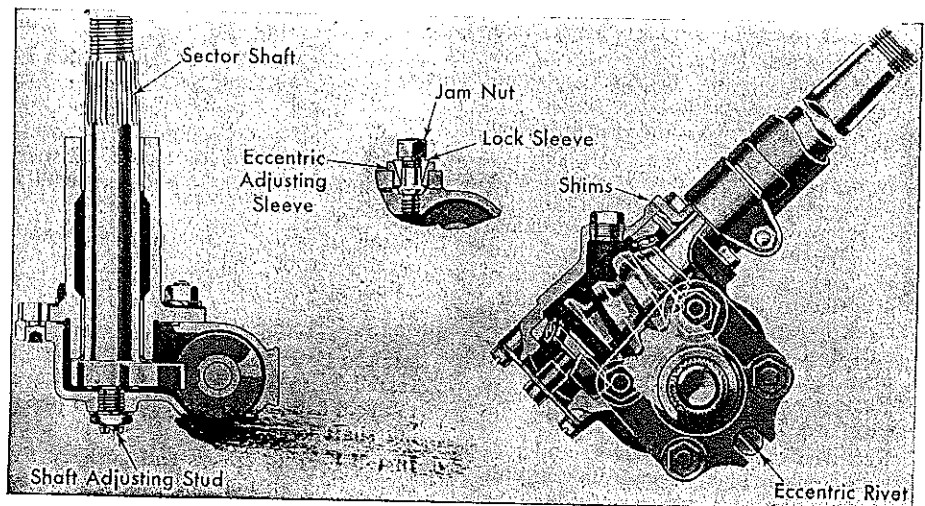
Gemmer models 120, 140. Worm and sector gear
